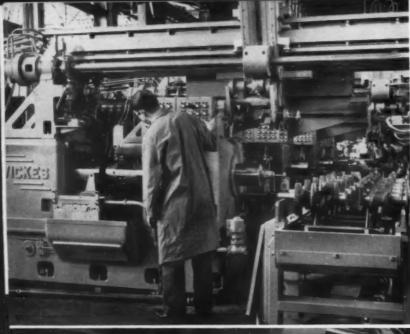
First machine of a fourstation in-line setup for machining forged-steel crankpins. Starting point of an automatic, straight-through conveyor that links the four machines together is at the right.
